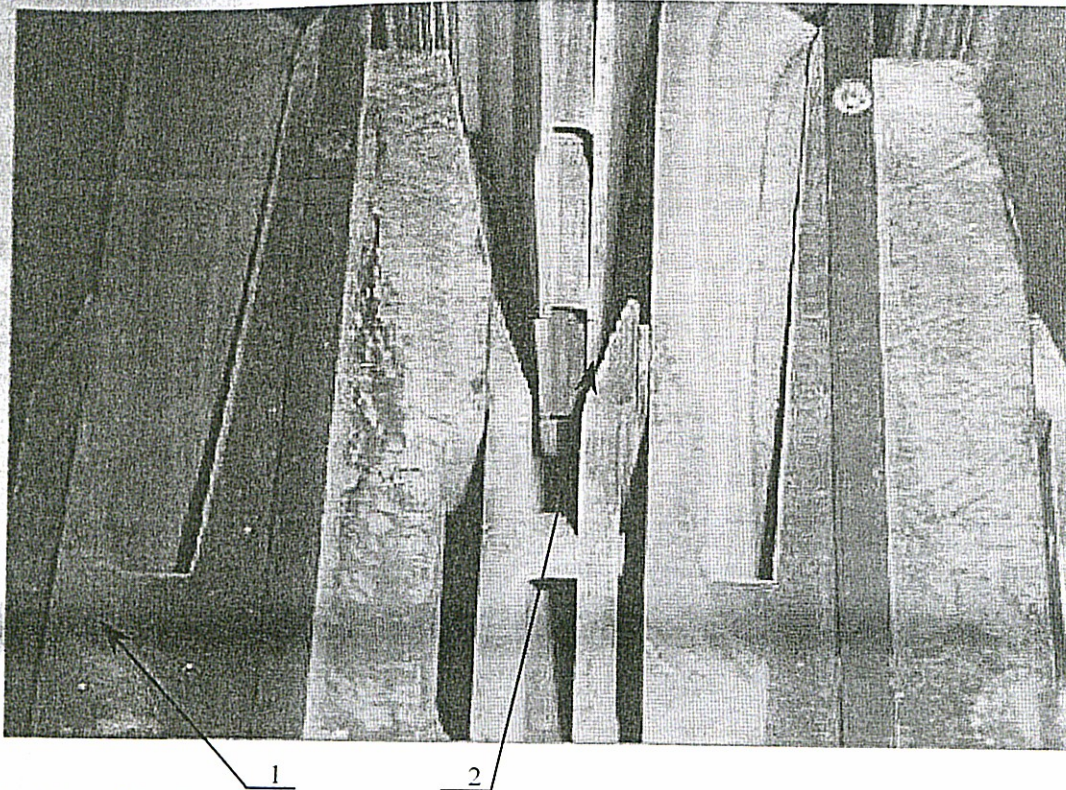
Defects of the working wheel-diaphragm 1 and sealing in the separating plane 2 of turbocompressor K 1290-121-1.
